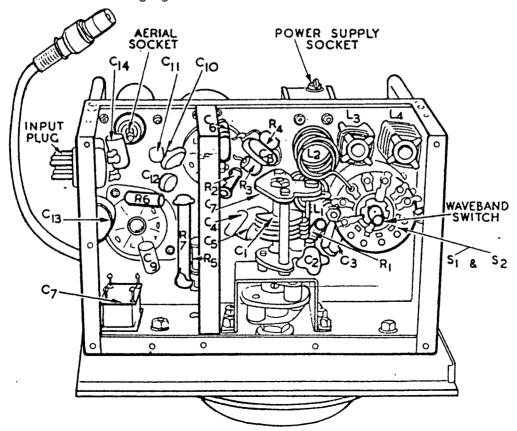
Test set type 210 — RF. unit; underside view of chassis
